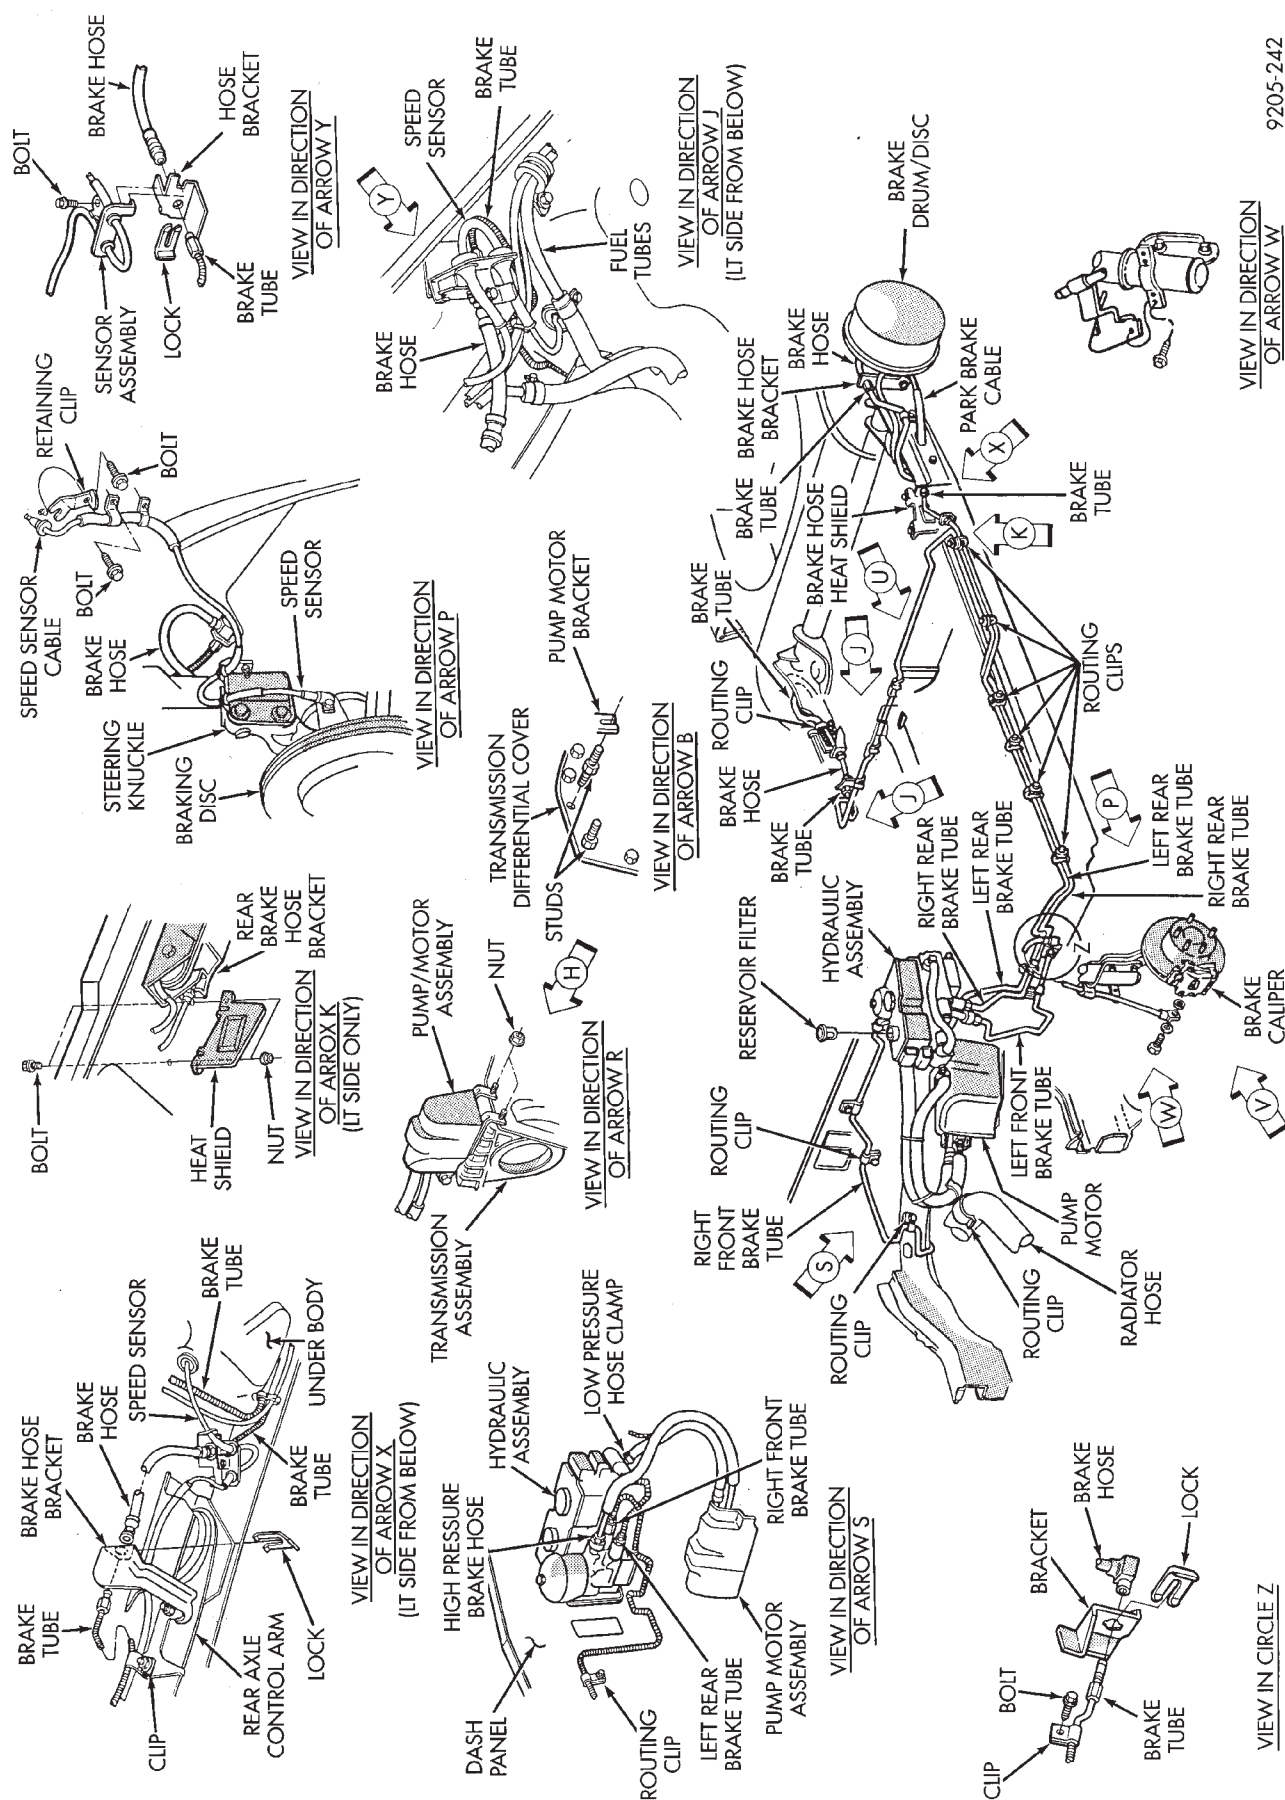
BRAKE LINE ROUTING WITH ANTI-LOCK 10 BRAKES
